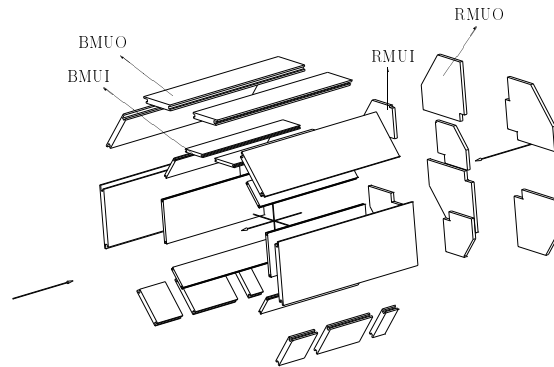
An exploded view of the barrel and rear muon chambers.
